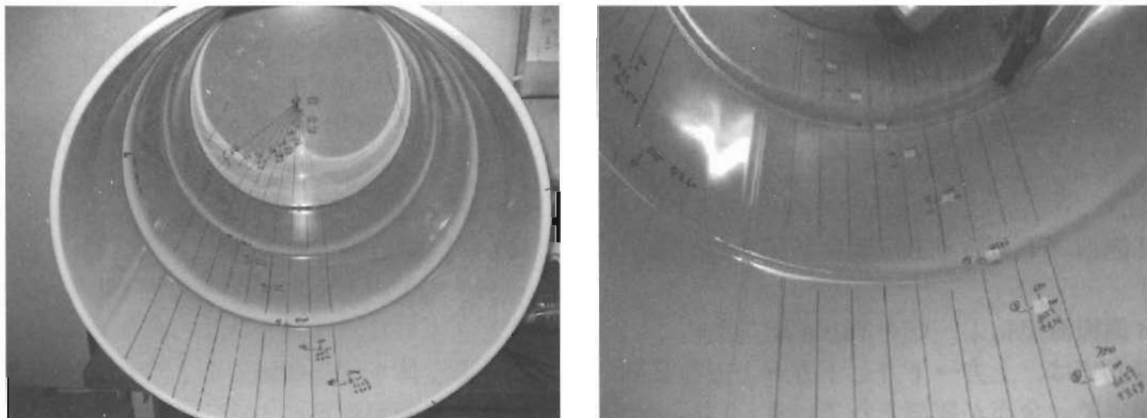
Mock Test-Piece of Corroded Holes (Bottom Plate)
